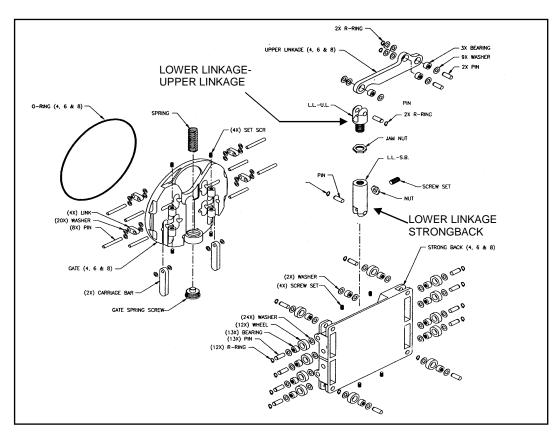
STRONGBACK AND GATE ASSYS DRAWING
